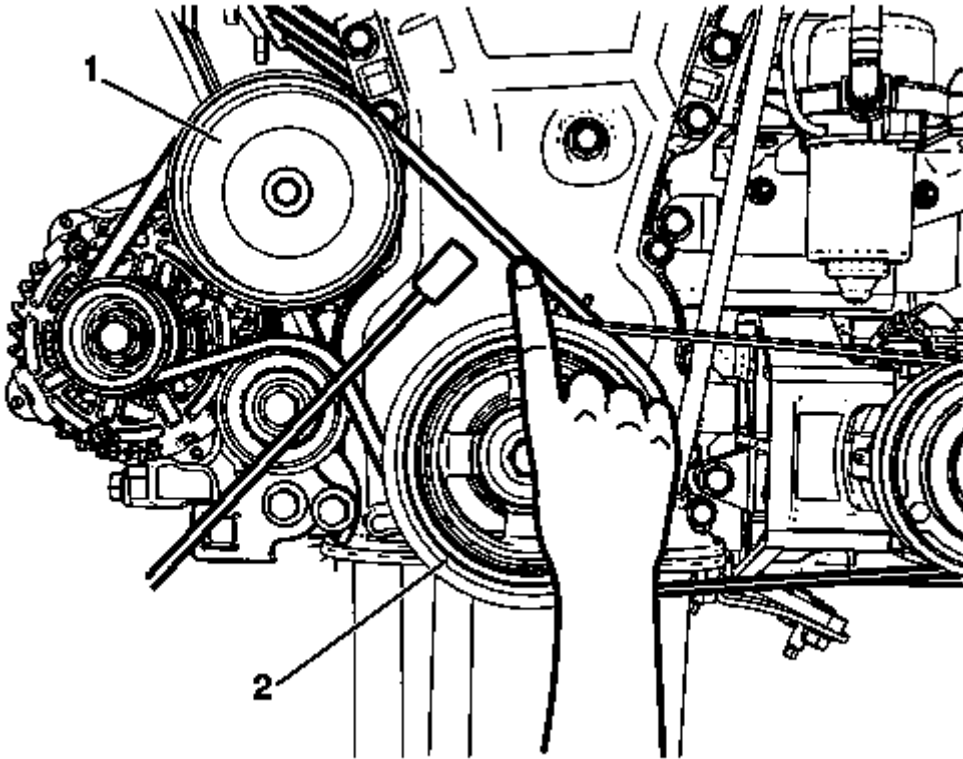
Locating Finger On Center Of Belt Span Between Water Pump Pulley And Crankshaft Pulley
